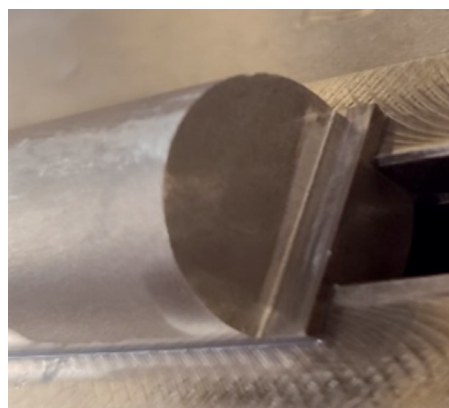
Sample surface after machining with *JJ Tools 4SUE080120S08
